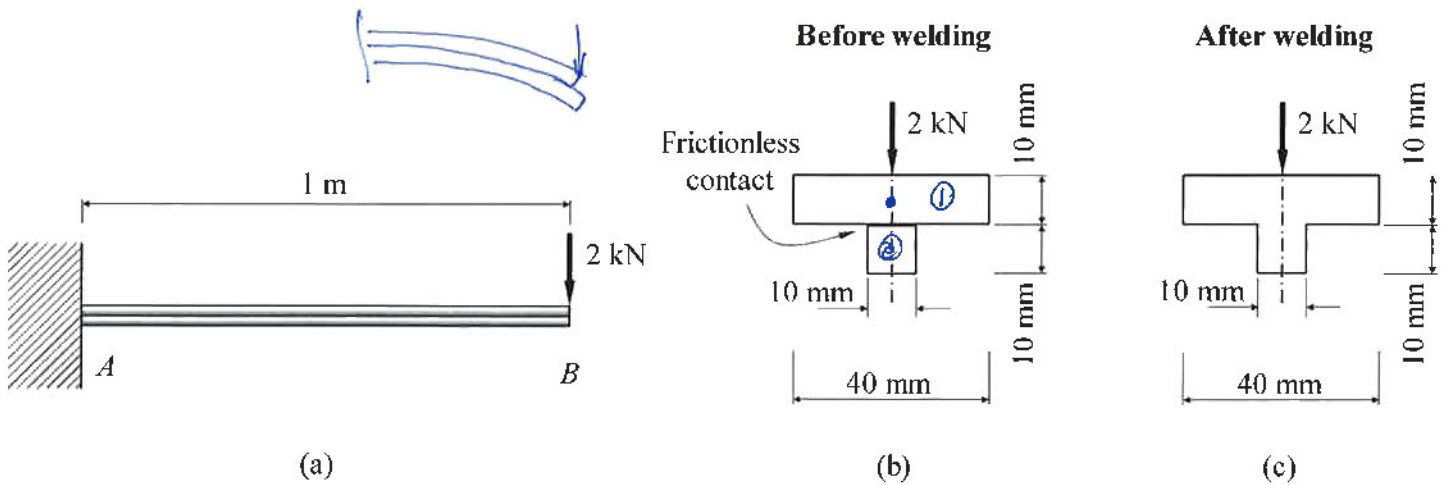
A T-section beam before and after welding the web on to the flange.
